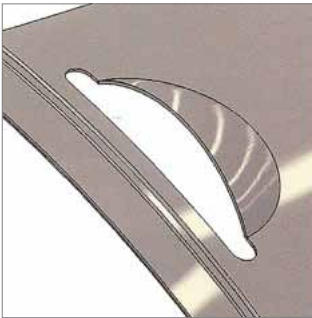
Close-up of critical section of stamped component<sup>21</sup>
